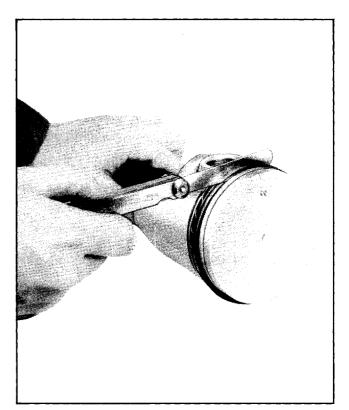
Measuring Side Clearance of Ring in Groove
